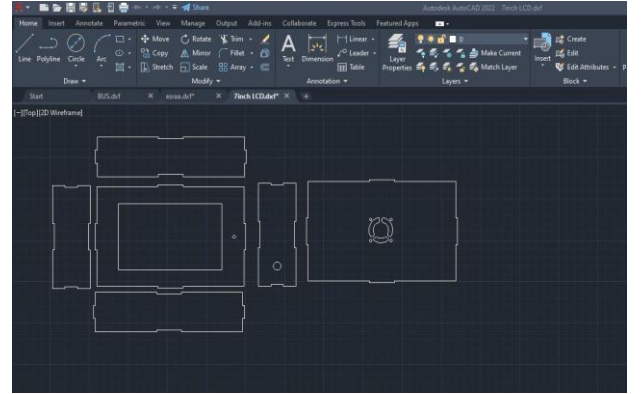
Mechanical enclosure design for the handheld screening unit.
